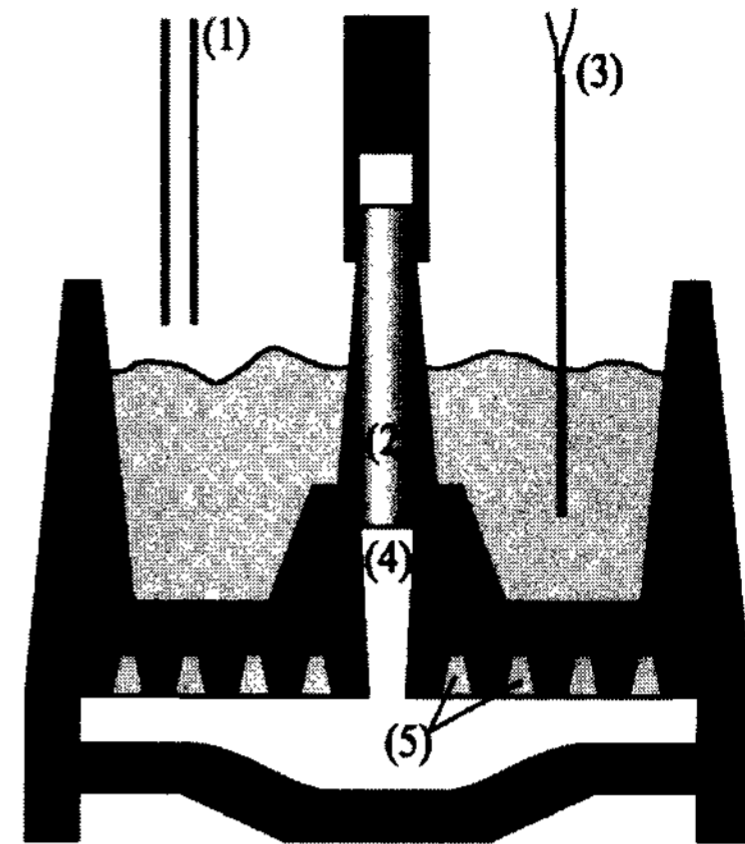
Schematic diagram of fluidity testing shell mold. (1) contact electrode, (2) stopper, (3) thermocouple, (4) sprue, (5) channels, (6) arm, (7) pouring basin.
